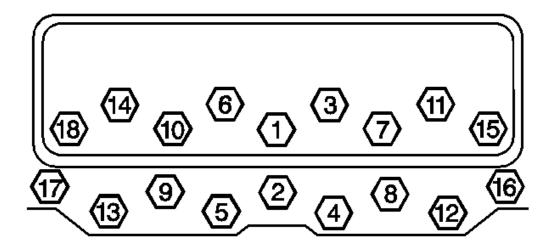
Cylinder Head Bolt Tightening Sequence Courtesy of GENERAL MOTORS CORP.
